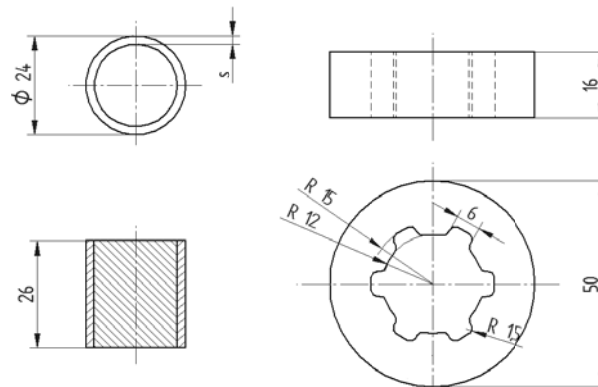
Initial billet and die insert for gear-like element radial extrusion simulation
